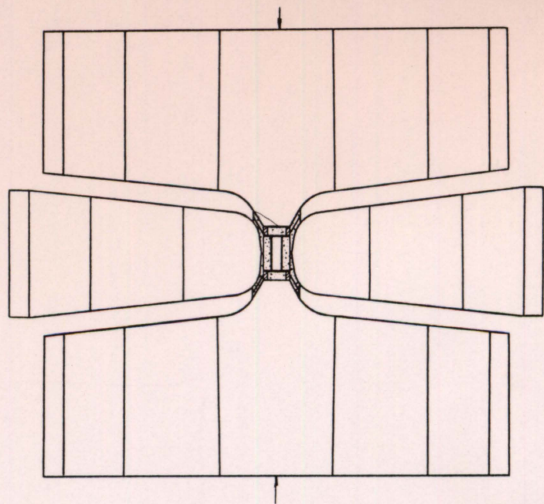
The "belt," ultra-high-pressure, high-temperature assembly.
